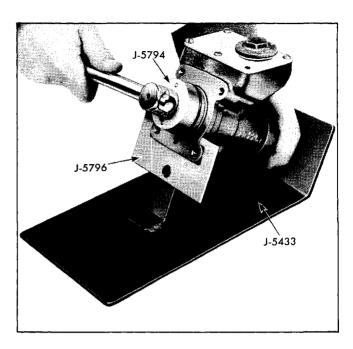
Removing or Replacing Cylinder Plug Assembly
